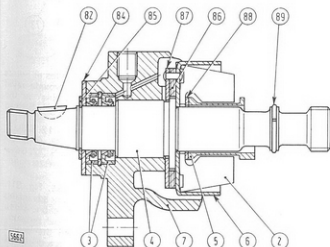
Section Through Drive Shaft and Checking Shaft End Float Using a Feeler Gauge
